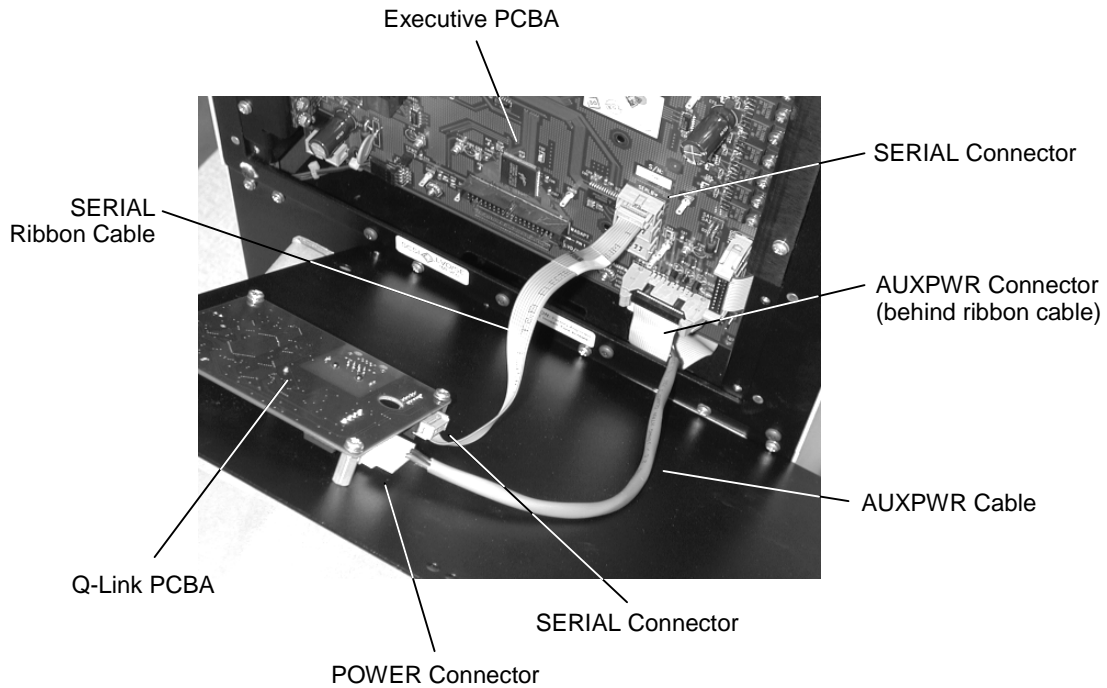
Detail of AUXPWR and SERIAL Cable Connections on Q-Link PCBA
